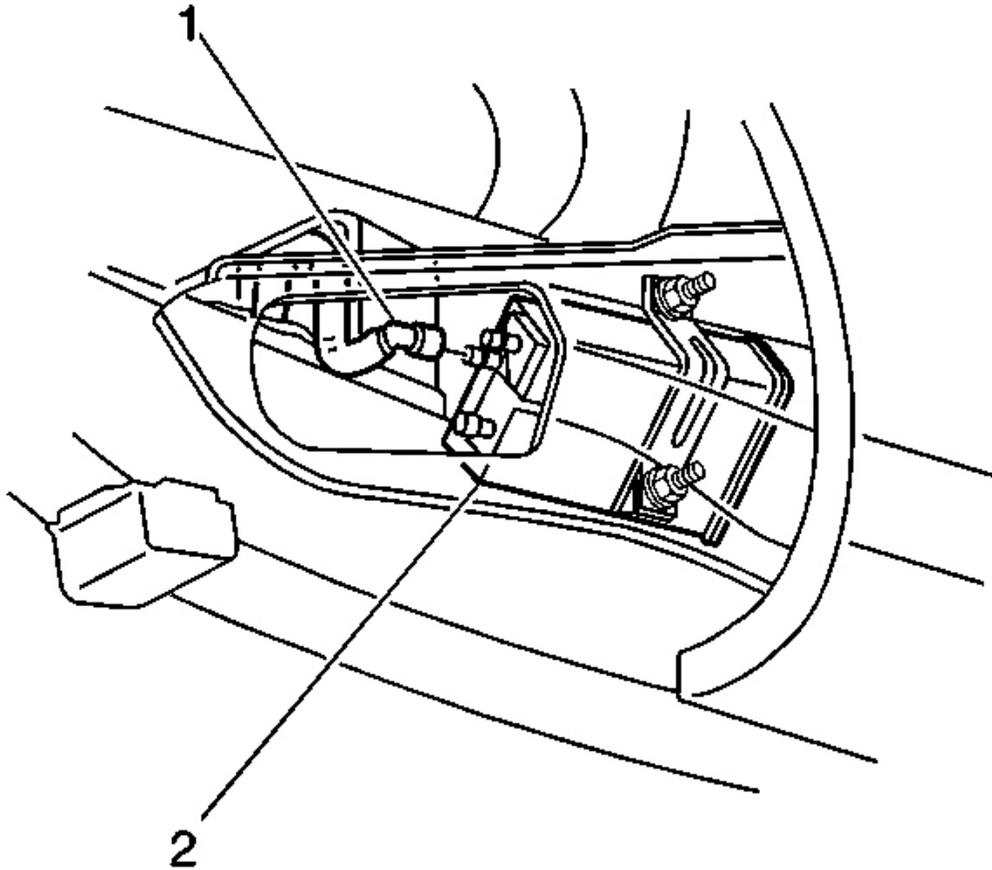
Fuel Tank Strap Mount & Bolts
